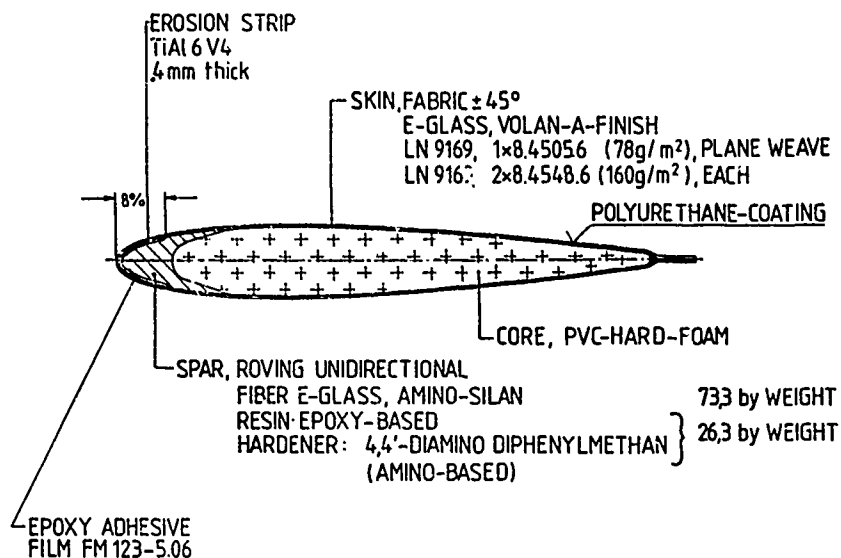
TAIL ROTOR BLADE, CROSS SECTION
